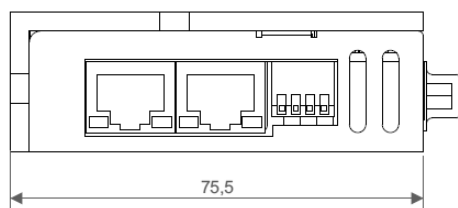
Dimensions in mm (top, E°Darc S05/12)
